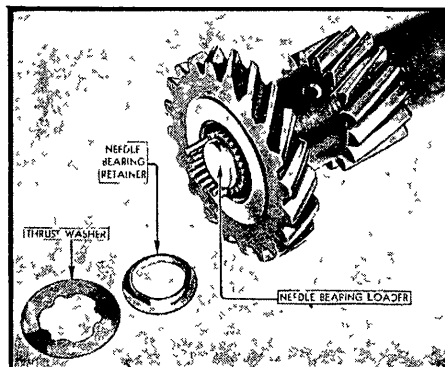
Assembling countershaft rollers on synchronmesh transmission, 1939-51
